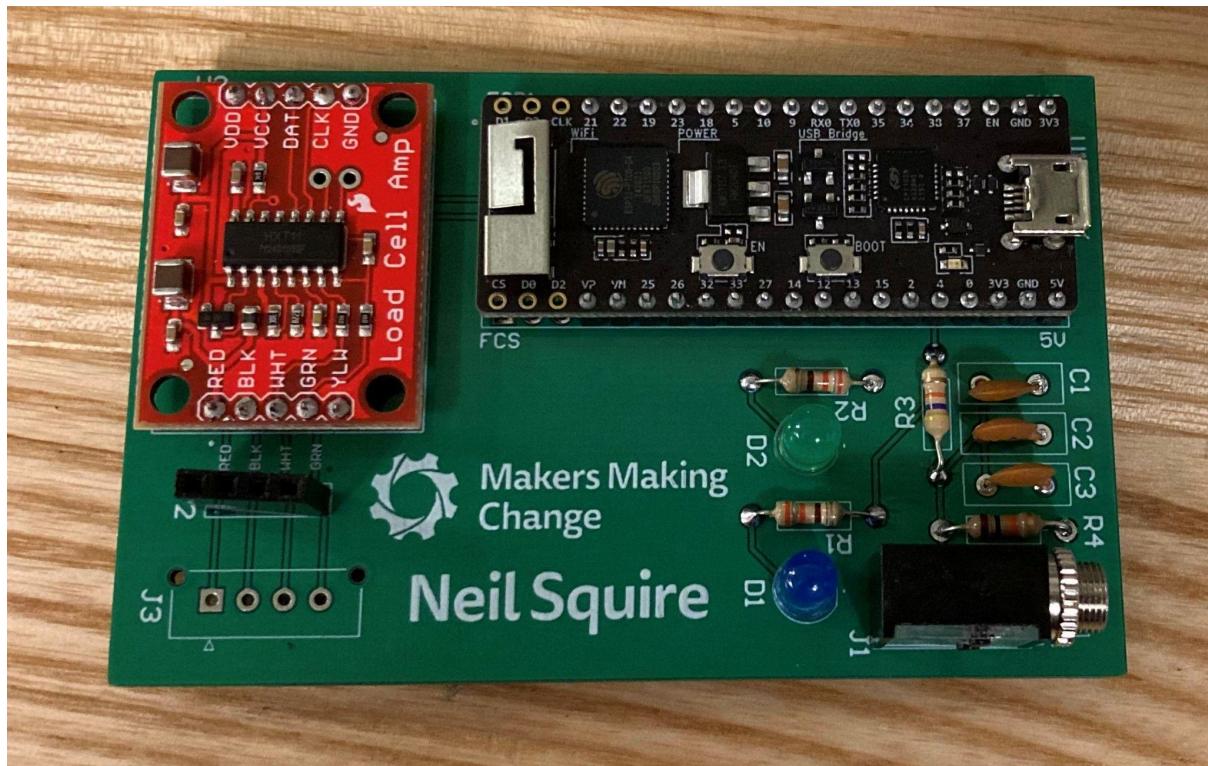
Breakout PCB developed based on schematics shown above, using Through hole components for ease of assembly.
